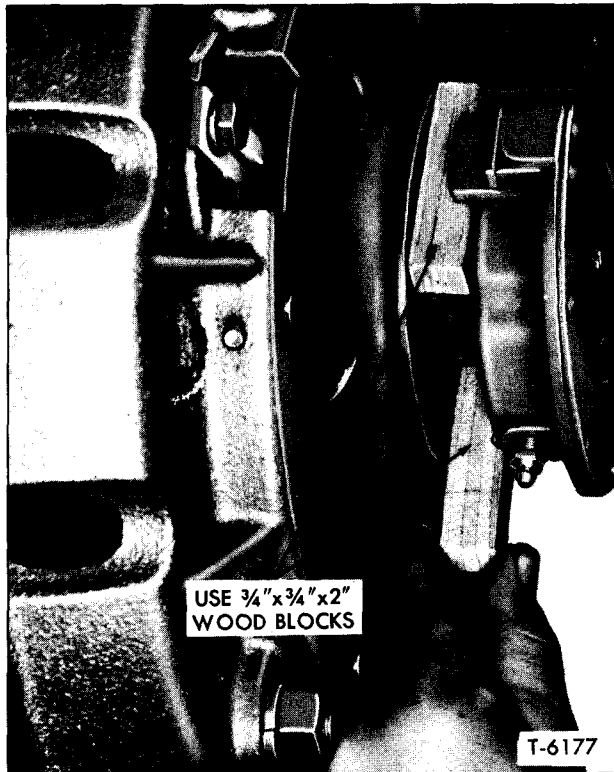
Use of Blocks Between Release Bearing and Spring Plate Hub
